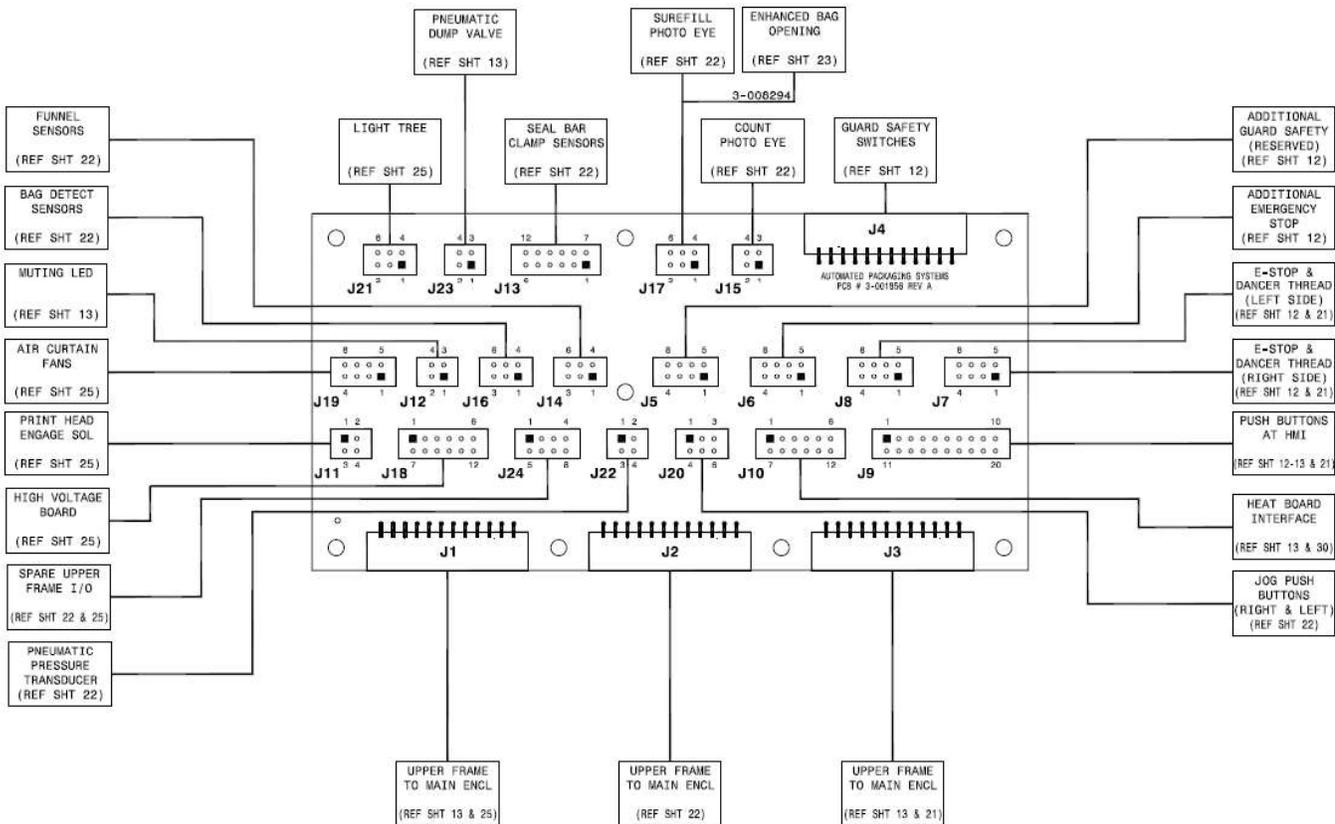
UPPER FRAME CONNECTOR BOARD P/N 3-001856
